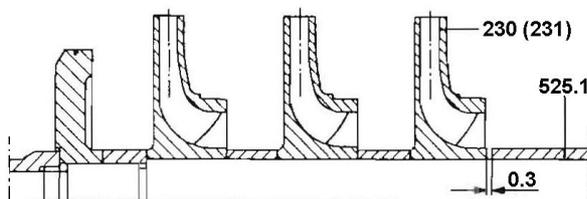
Axial rotor clearance (sizes 40 and 50)
